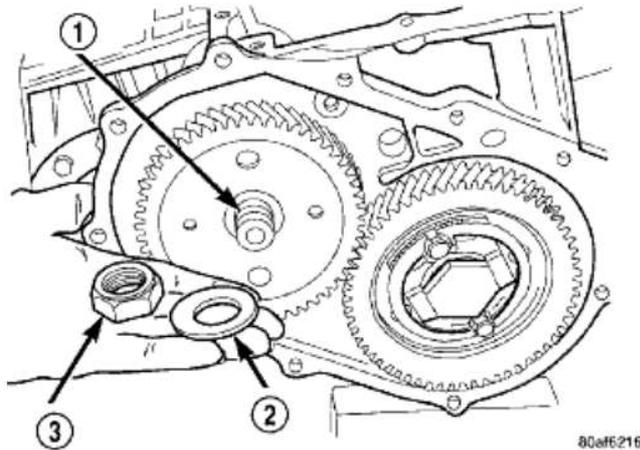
Removing/Installing Transfer Shaft Gear Nut & Coned Washer
